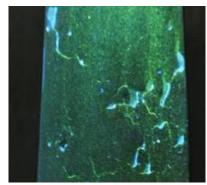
Defects detected in parent material and welded joints of anchor of breeches pipe no.1.
